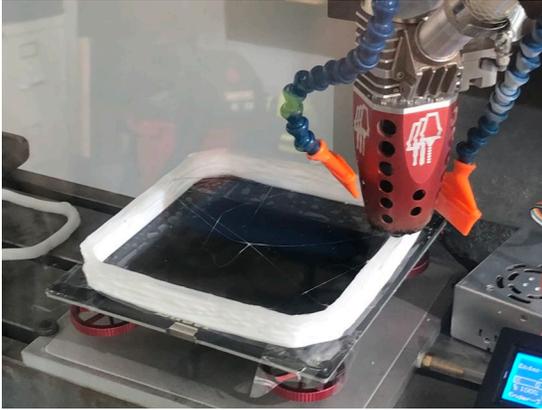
FPF Layer Deposition Printing (X Direction Part)
